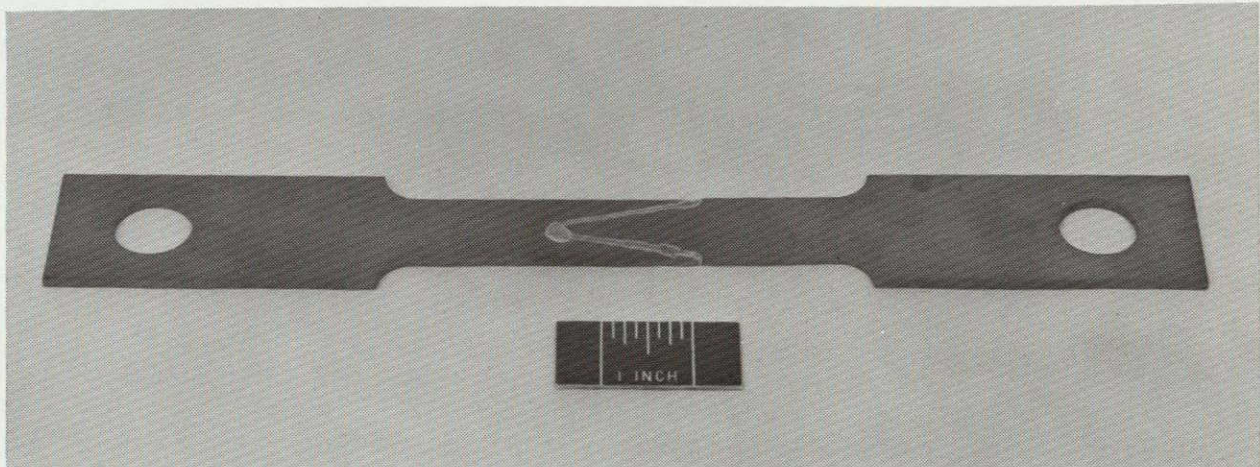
TAPERED FINGER JOINT SPECIMEN
